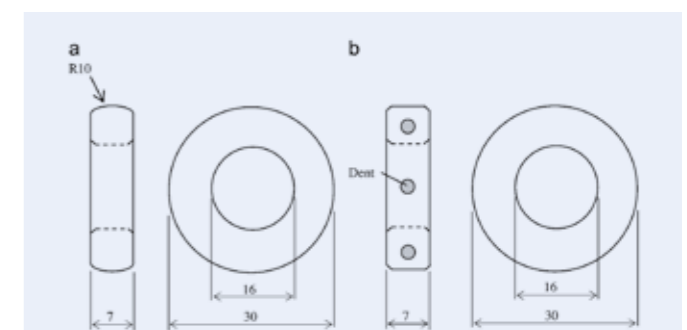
Driving and driven disks of the twin-disk test machine (mm): (a) Test piece (outside diameter contact surface with rounded shape and no dents). (b) Test piece with dents.
